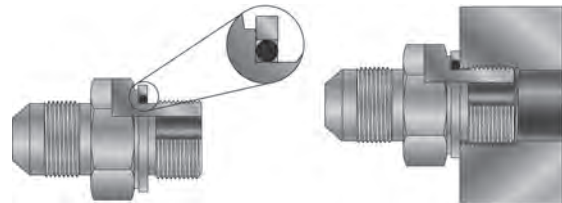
O-Ring with Retaining Ring, Types G & H
